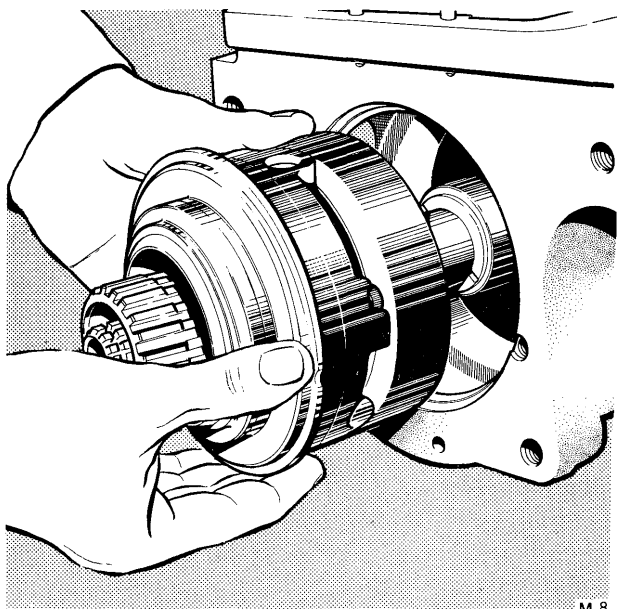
REMOVING THE PUMP AND DRIVE-SHAFT
